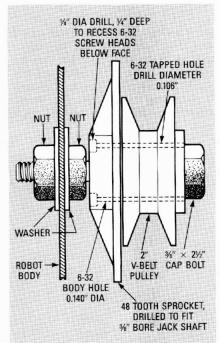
JACKSHAFT DETAILS. Be sure that the unit is assembled so that the chain and the pulley are as close as possible.
